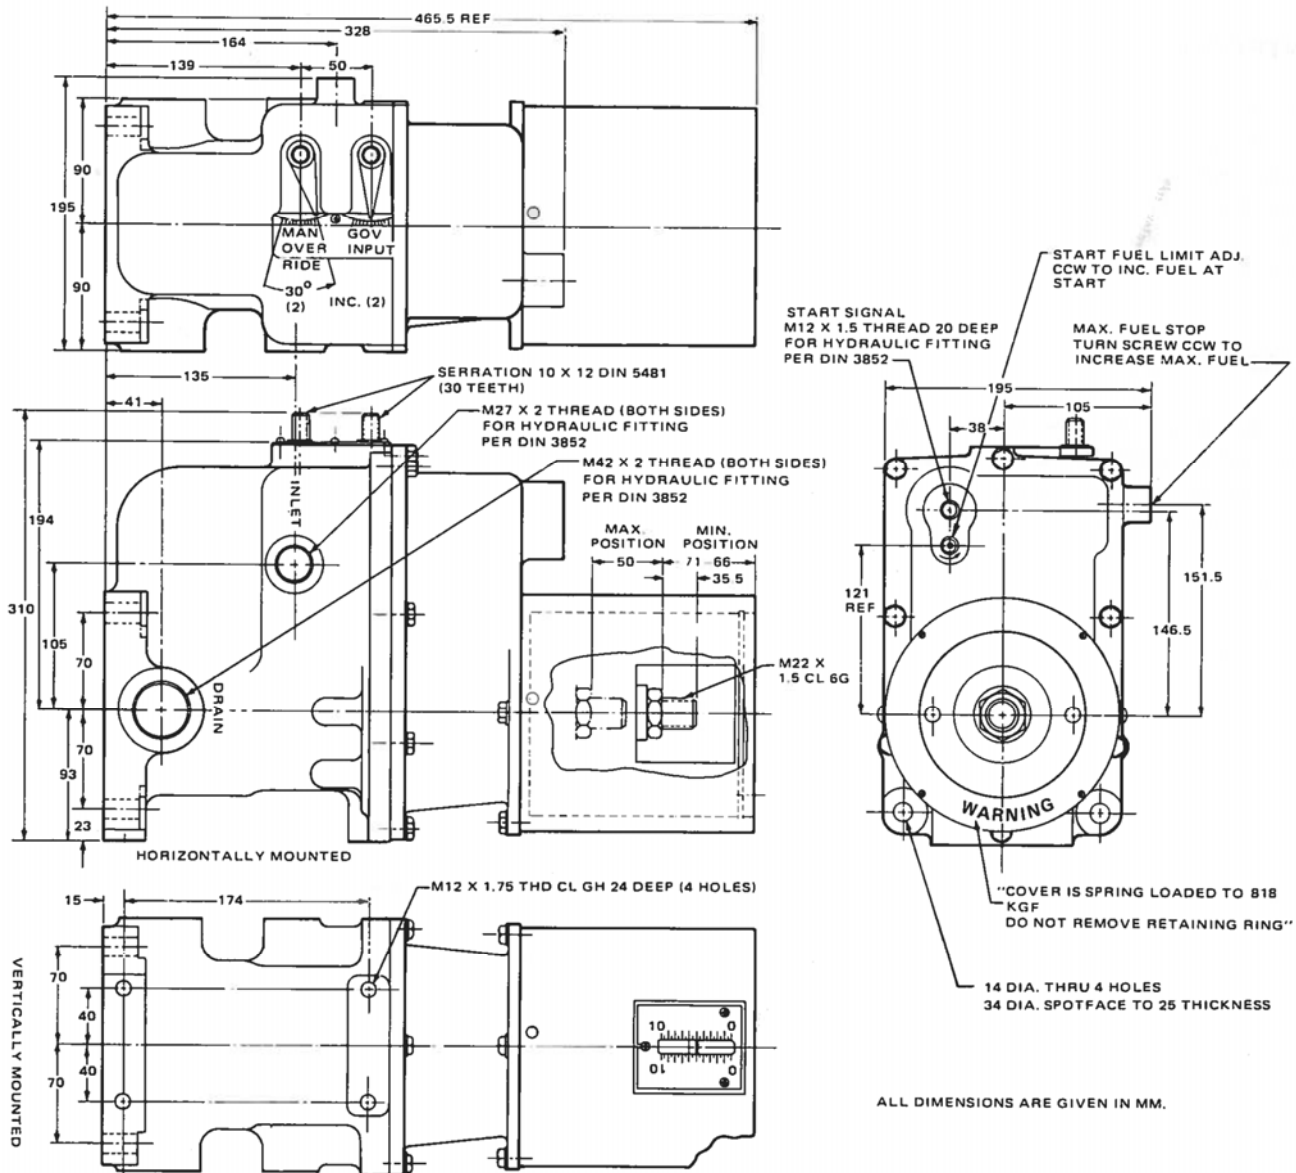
Outline Drawing of 85 mm Hydraulic Amplifier
